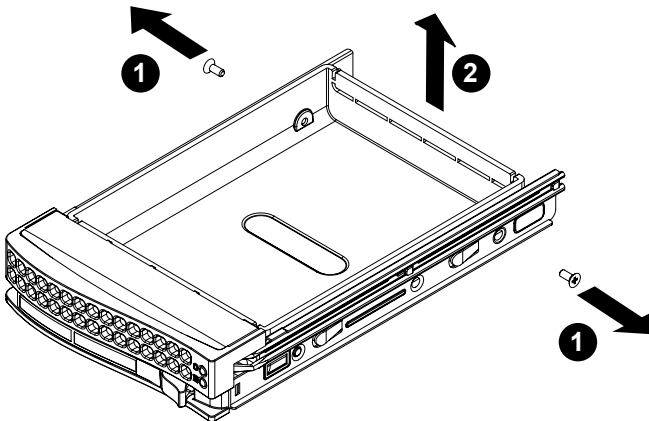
Removing the Dummy Drive from the Hard Drive Carrier
